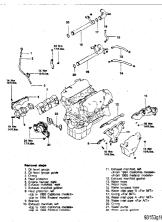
Exploded view of the exhaust manifold and related components—3.0L SOHC engine
